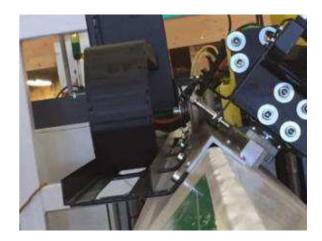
The racks prevents end position, that when the Y axis motor would be removed once and the machine loses the position that no unwanted is possible via the racks driving. The machine does not require a reference point more. You always know where it is, as long as the engine is not removed with the integrated measuring system without marking.
